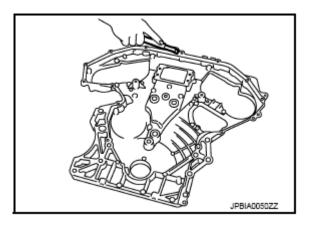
Removing Liquid Gasket From Front, Rear Timing Chain Cases And Oil Pan (Upper)
